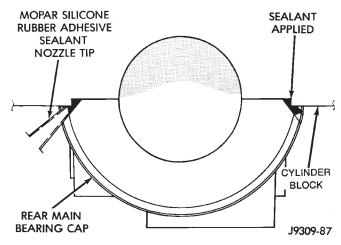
Apply Sealant to Bearing Cap to Block Joint OIL PUMP
